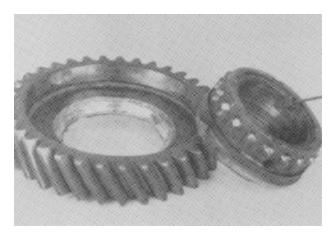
High Heat Welded Hub to Mainshaft
